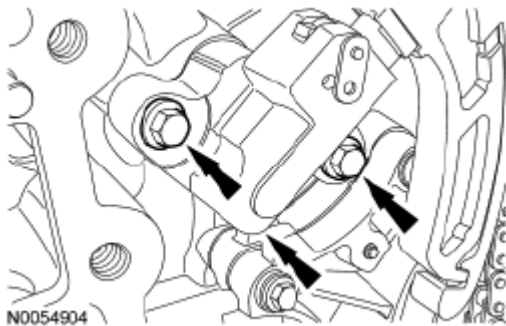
Locating Primary Timing Chain Tensioner Bolts
